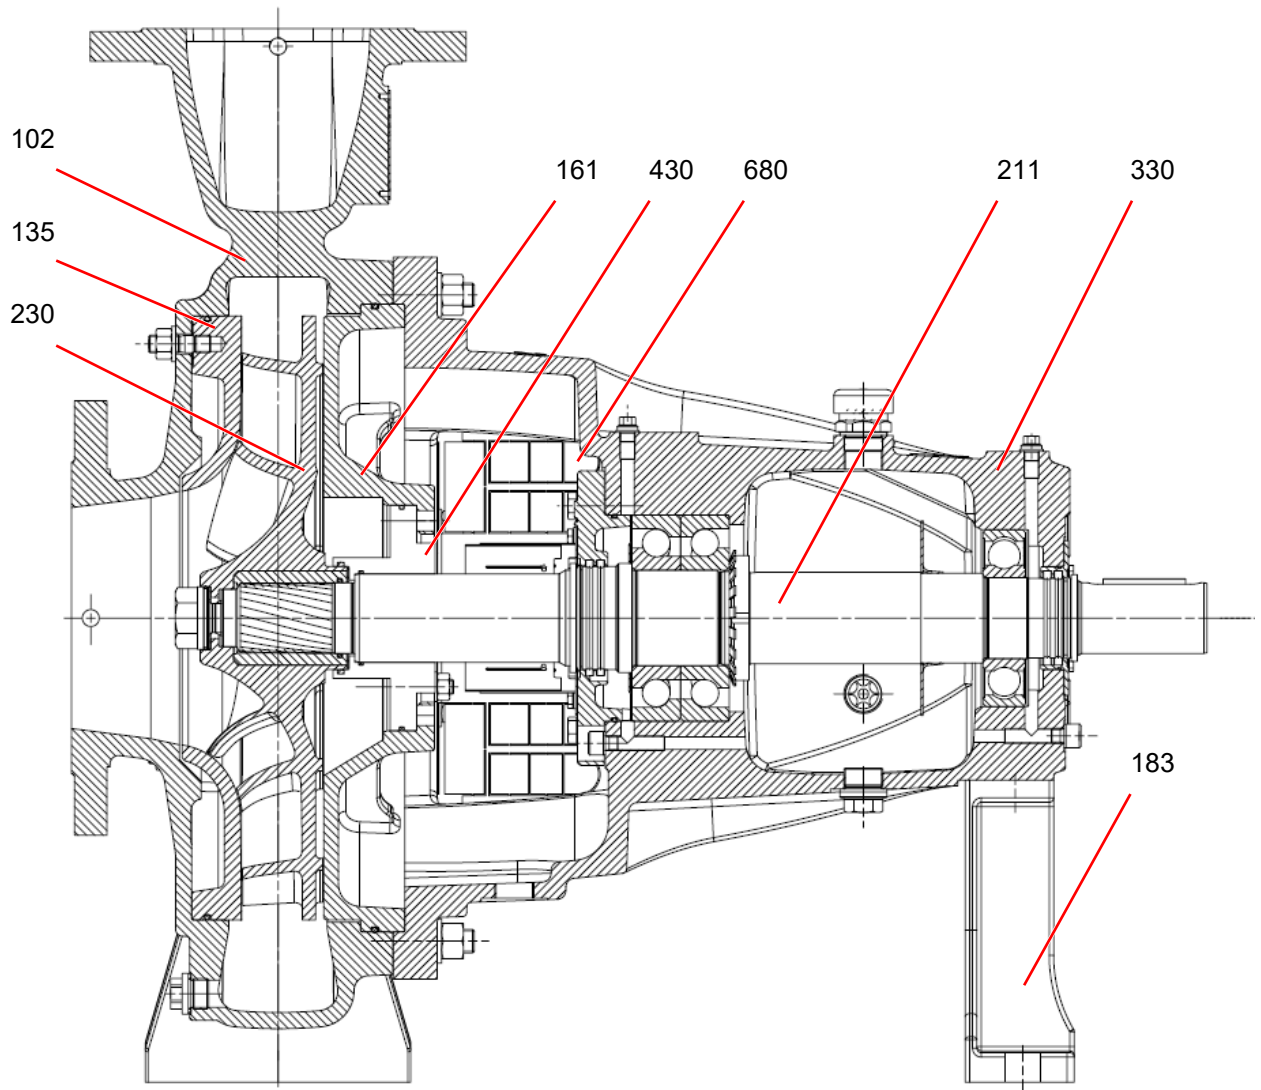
ACP centrifugal pump – principal section (semi-open impeller)
